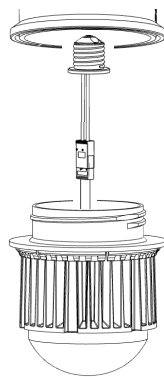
Screw in socket adapter and connect to the Q-Lux wiring harness
